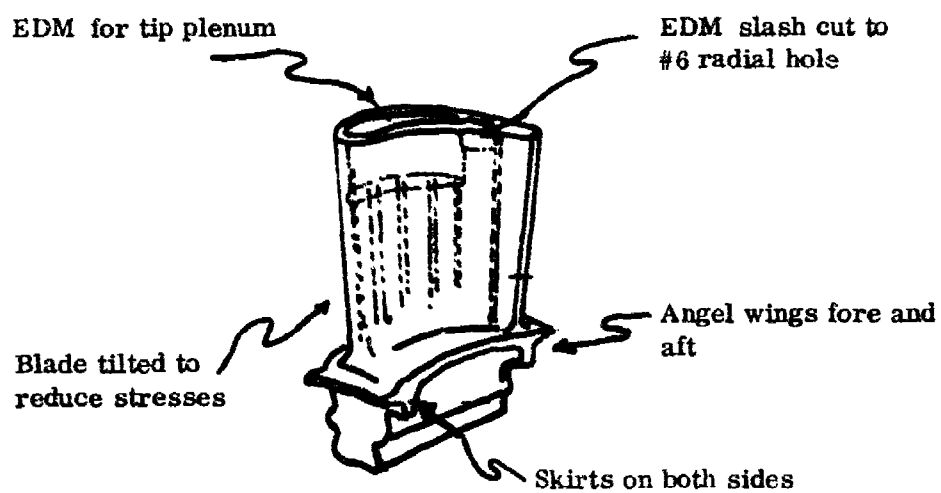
Schematic View Of MQT-Design Radial-Cooled Stage-Two Turbine Blade
